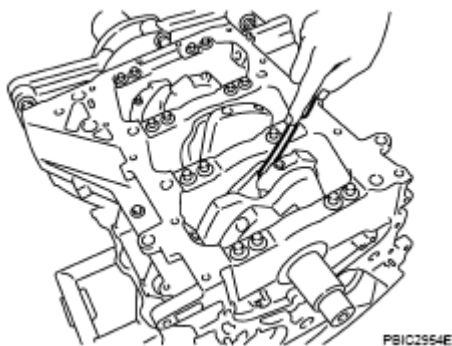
Measuring Side Clearance Between Connecting Rod And Crankshaft Arm
